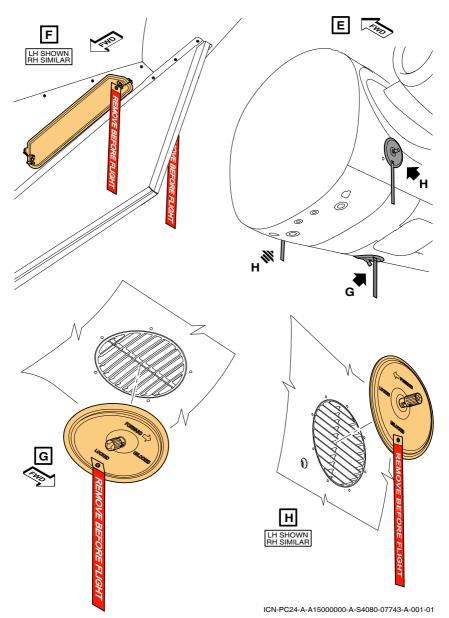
Parking - Lower Rear Fuselage Covers
